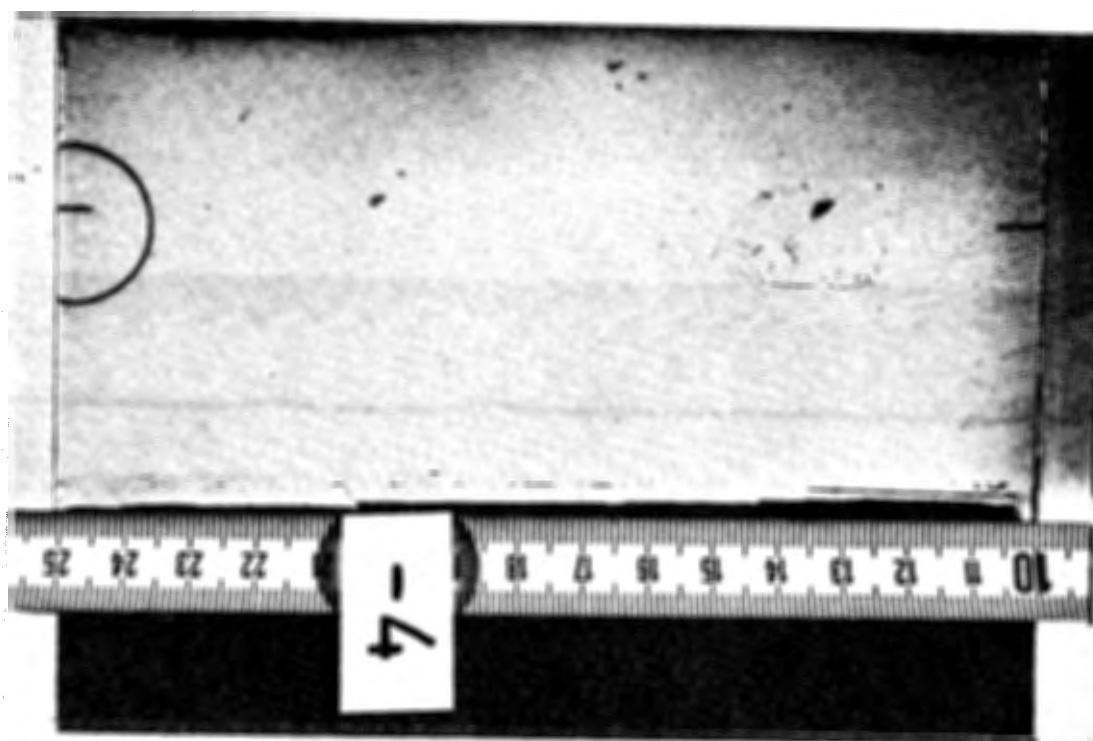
Specimen No. 4 : crack offset : -9 mm
